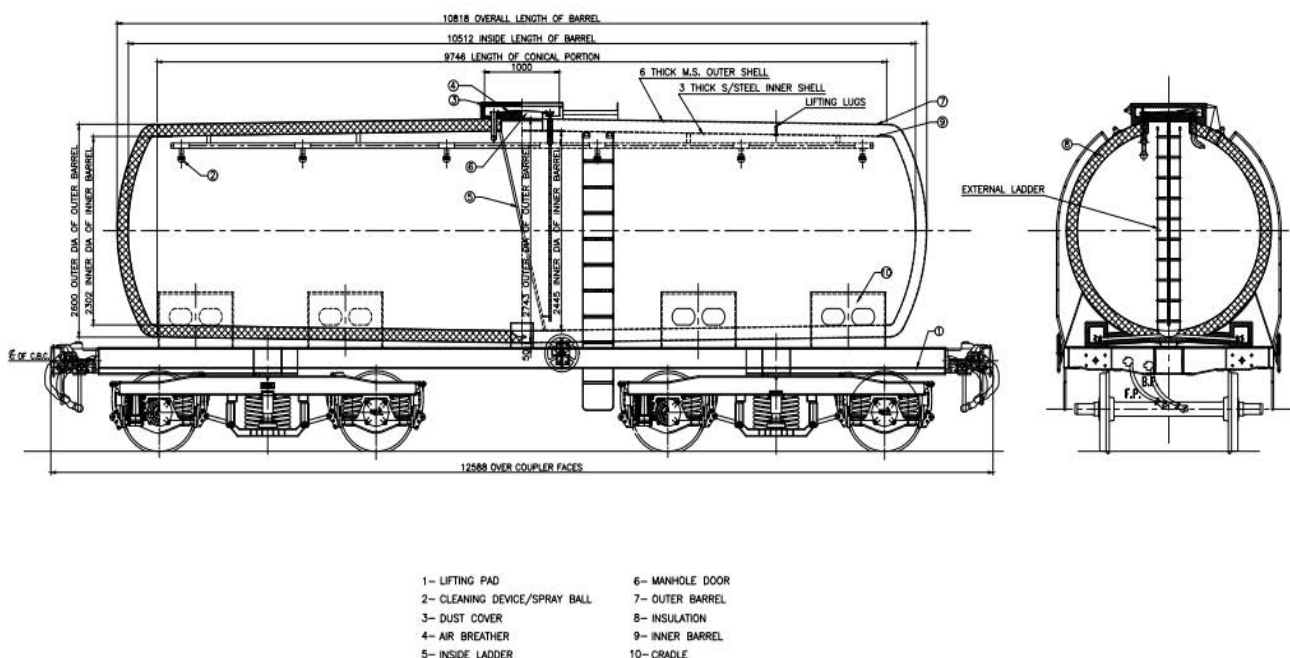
TYPICAL GENERAL ARRANGEMENT OF TAIL MILK TANK VAN
